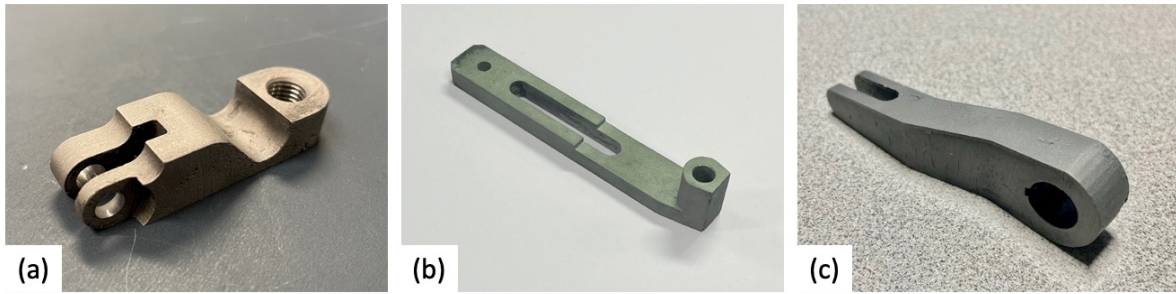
Final parts (a) Part#12314649; (b) Part#12446263; (c) Part#154072.
